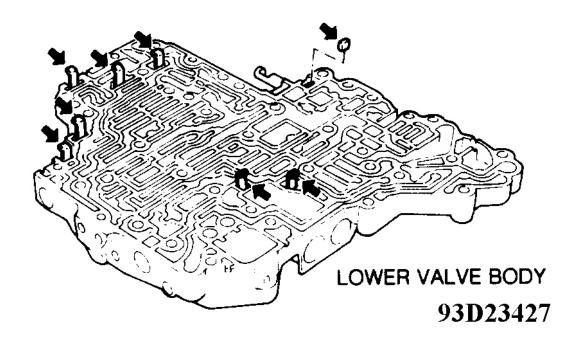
Identifying Retainer Plate Locations Courtesy of NISSAN MOTOR CO., U.S.A.
